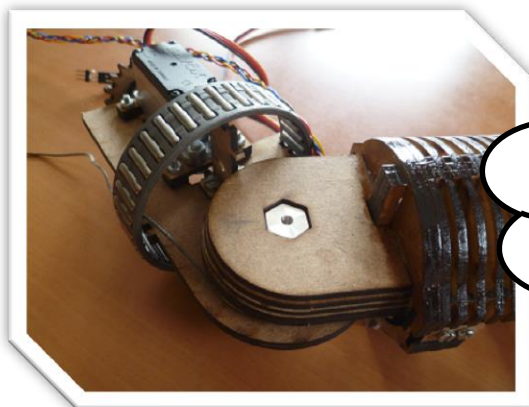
Assembly: Step 13 (gravity compensation mechanism not pictured)
